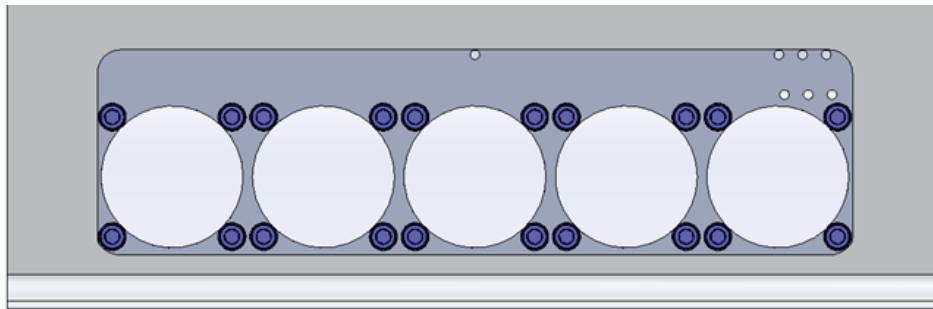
The cooling chamber inlet fans are positioned within the cooling chamber inlet cutout such that they are as low as possible within the inlet cutout without creating interference between the fan mounting bolts and the cooling chamber.
